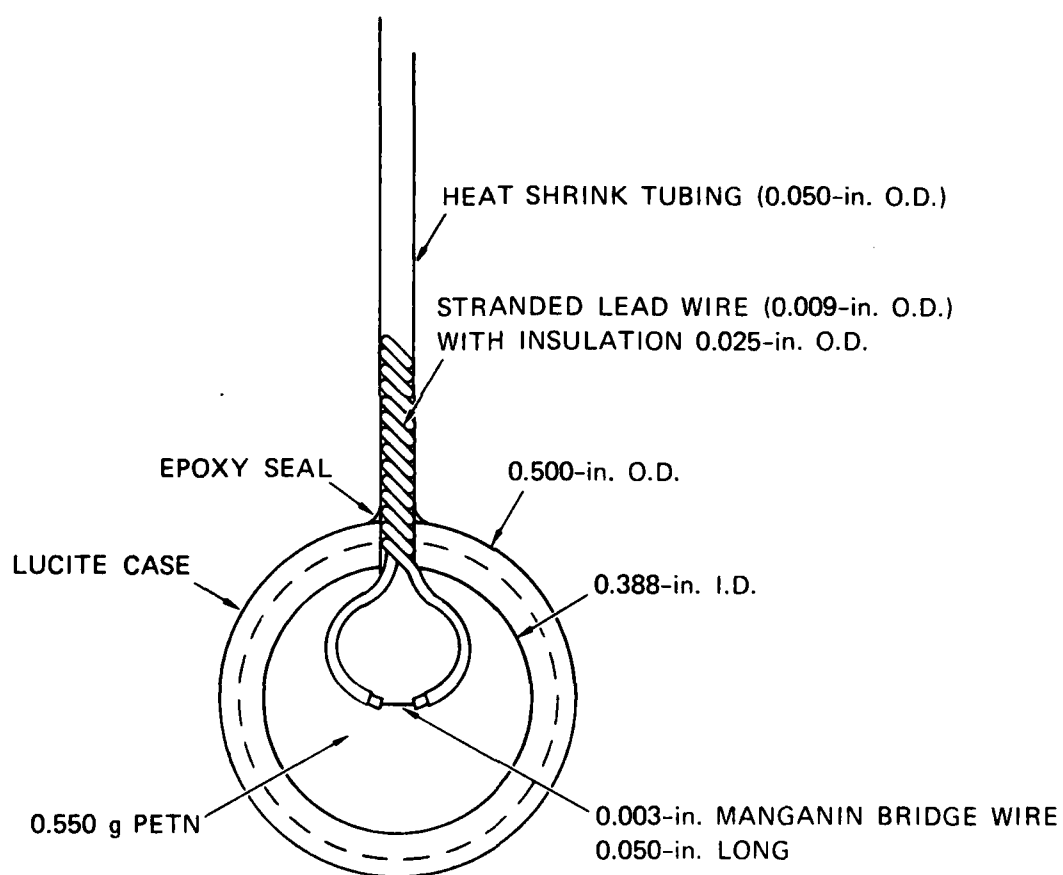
BASIC CONFIGURATION FOR EXPLODED CAVITY TESTS
